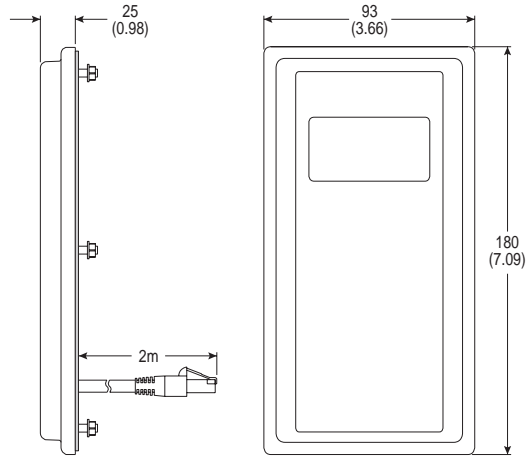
Remote (Panel Mount) HIM – Dimensions are in millimeters and (inches)
